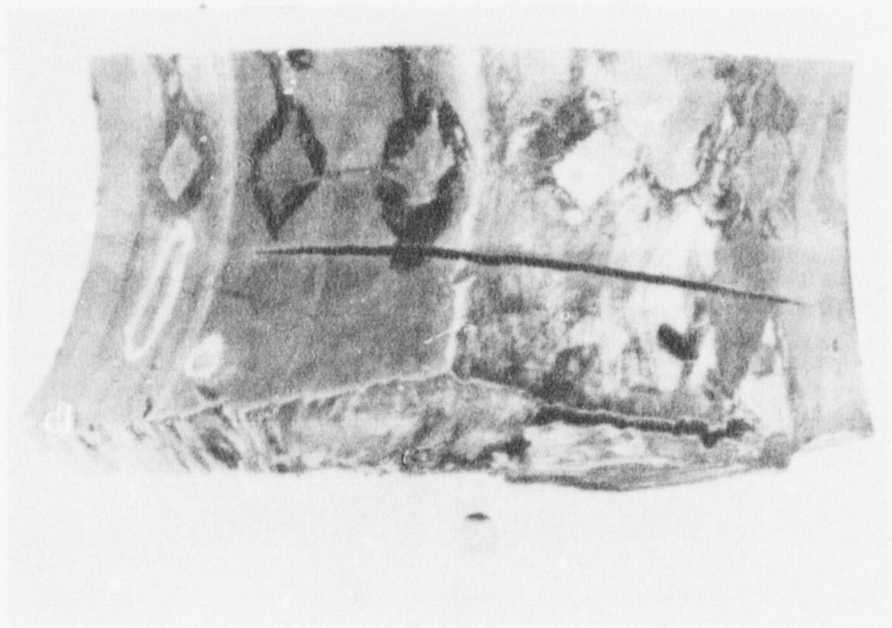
VIEW OF FATIGUE CRACK ON INSIDE
